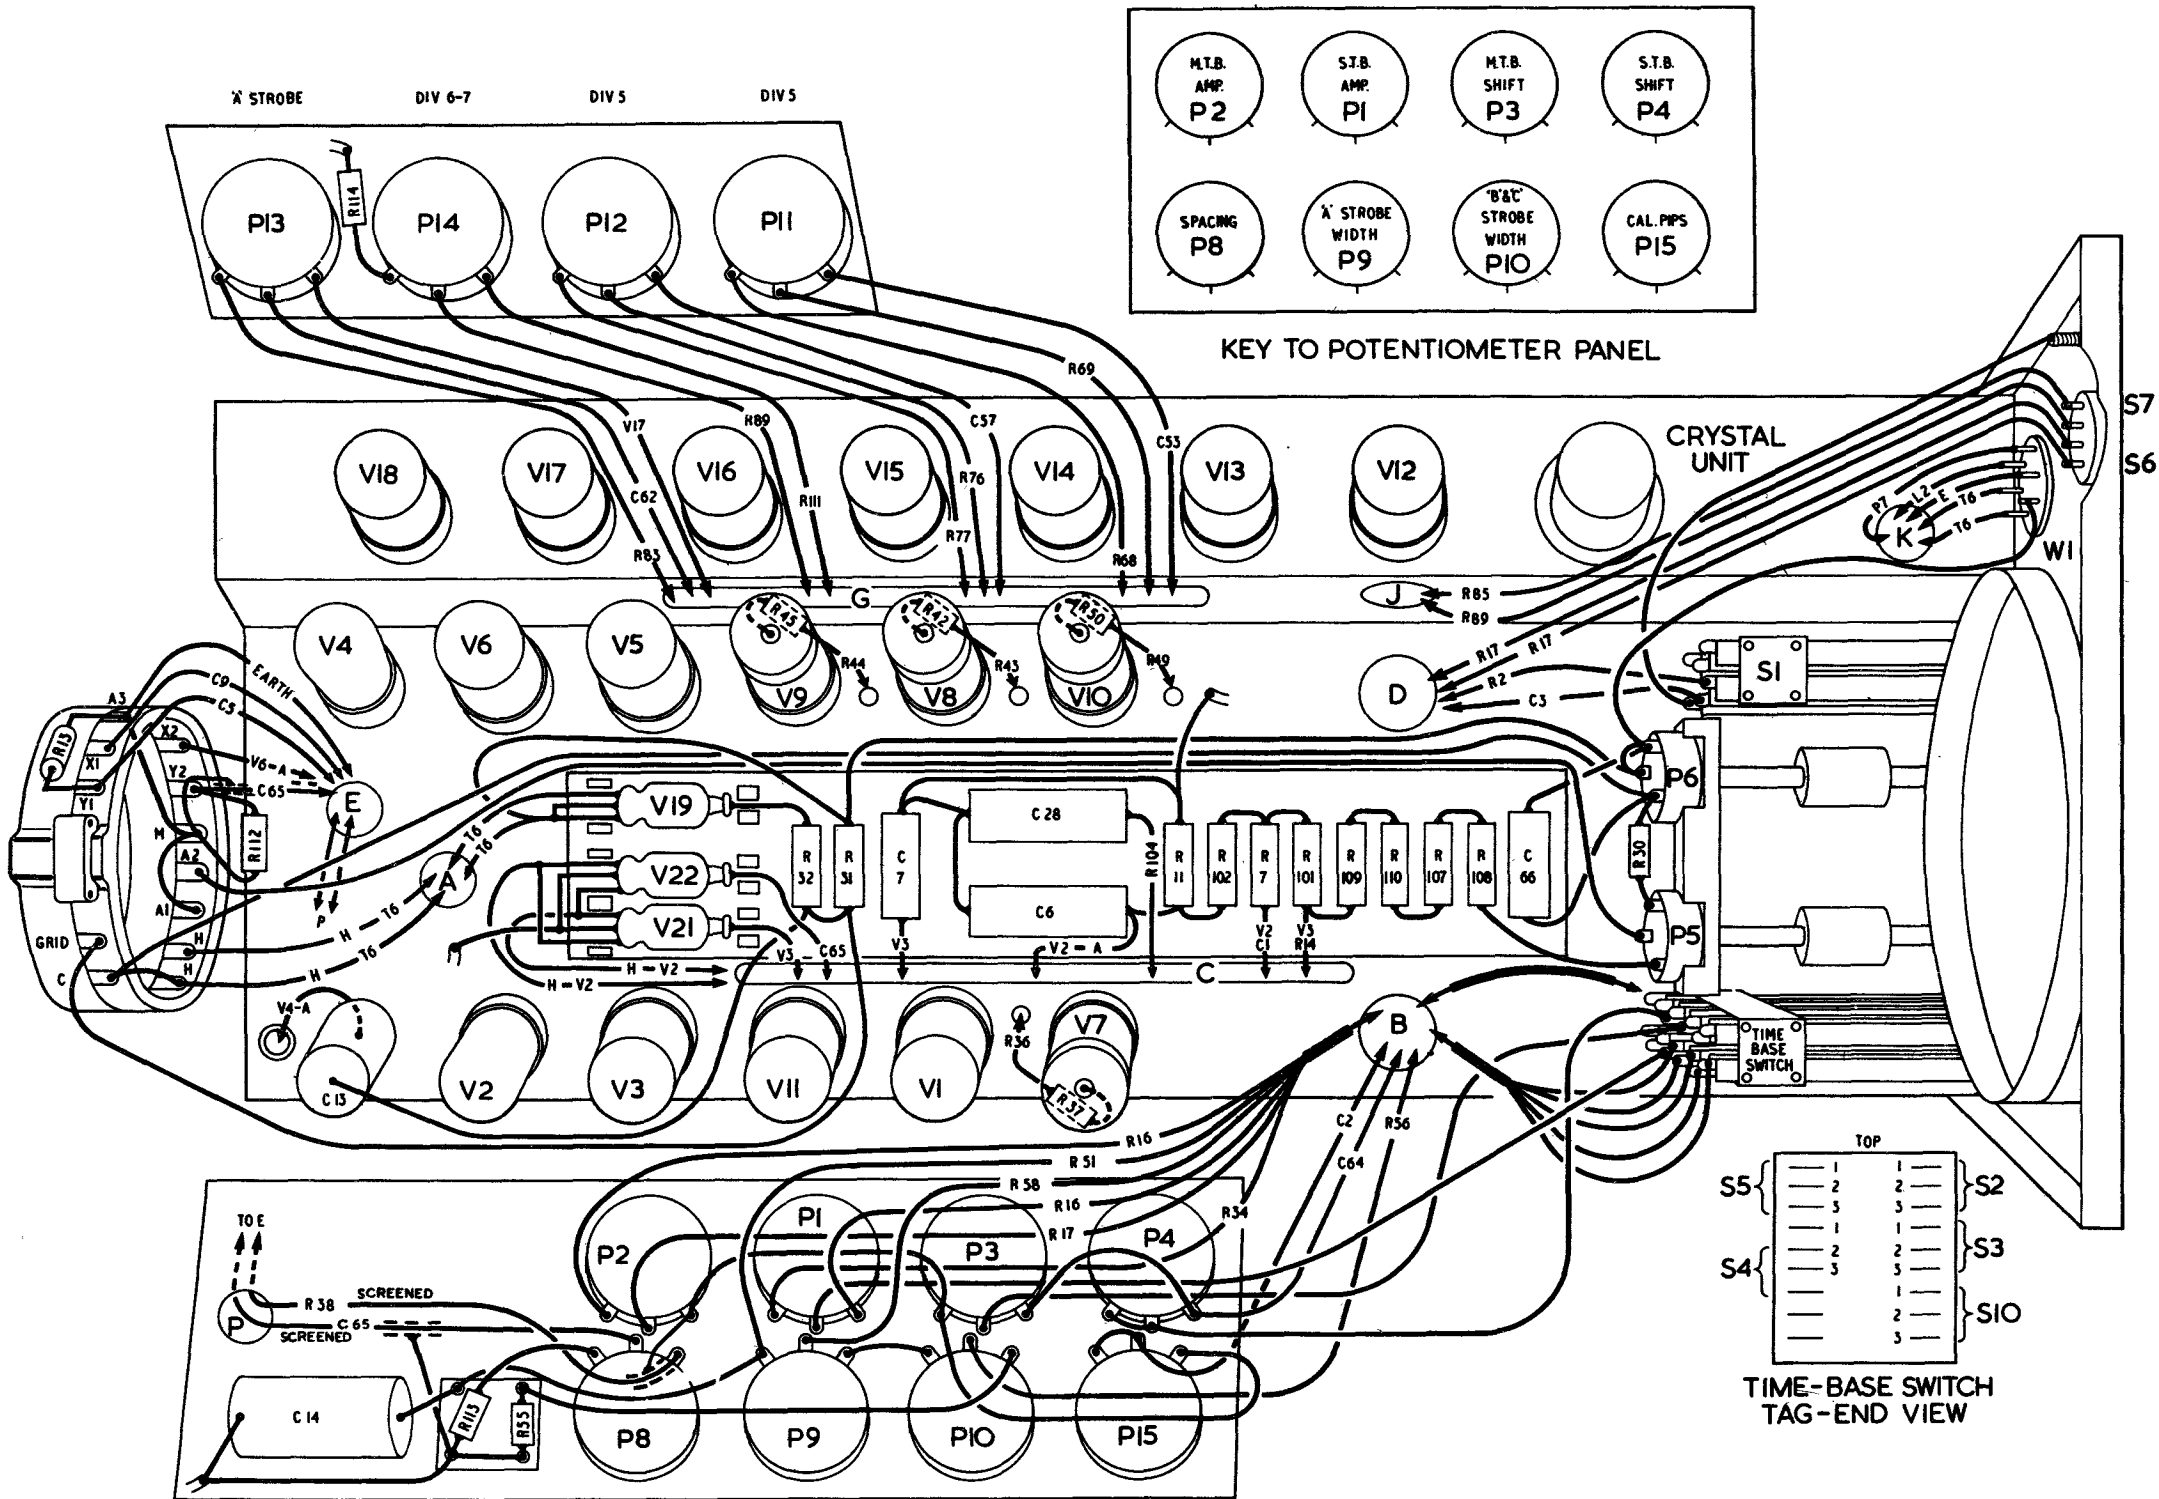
BENCH WIRING DIAGRAM OF INDICATING UNIT TYPE 62A-TOP OF CHASSIS
